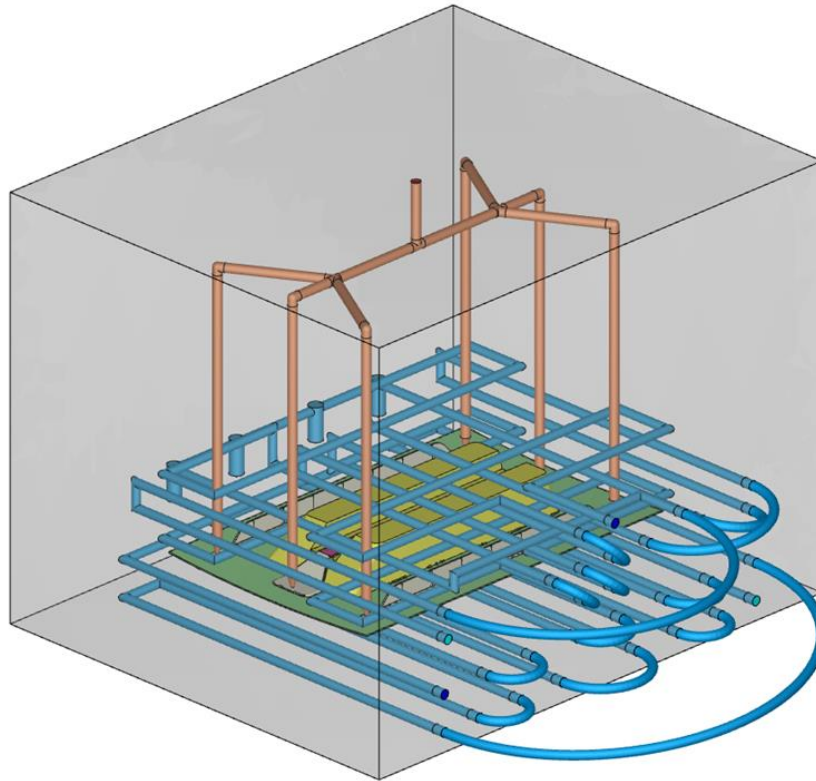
Moldex3D model of the OBStruct demonstrator part and tooling geometries
